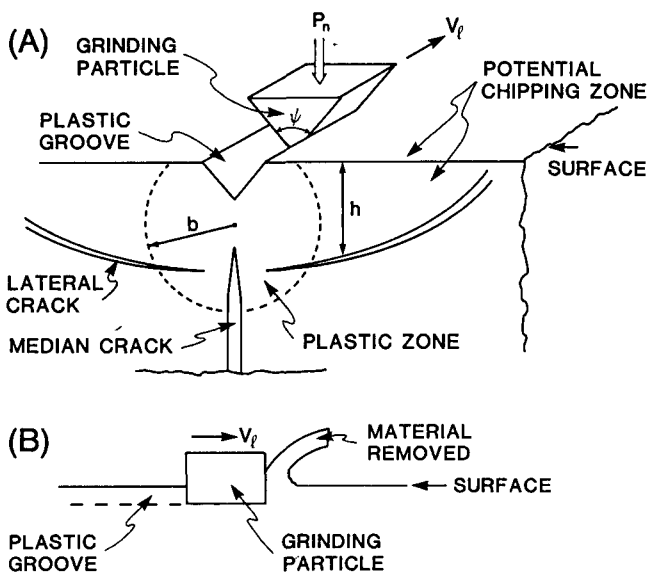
Fracture processes³: (A) lateral fracture mechanism; (B) plastic cutting mechanism.
